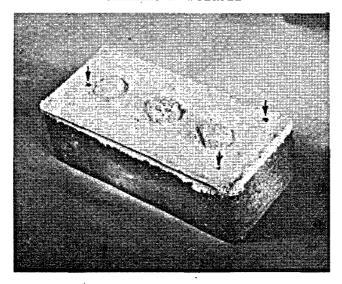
Ruptured specimen showing placement of ball-bearing separators.
